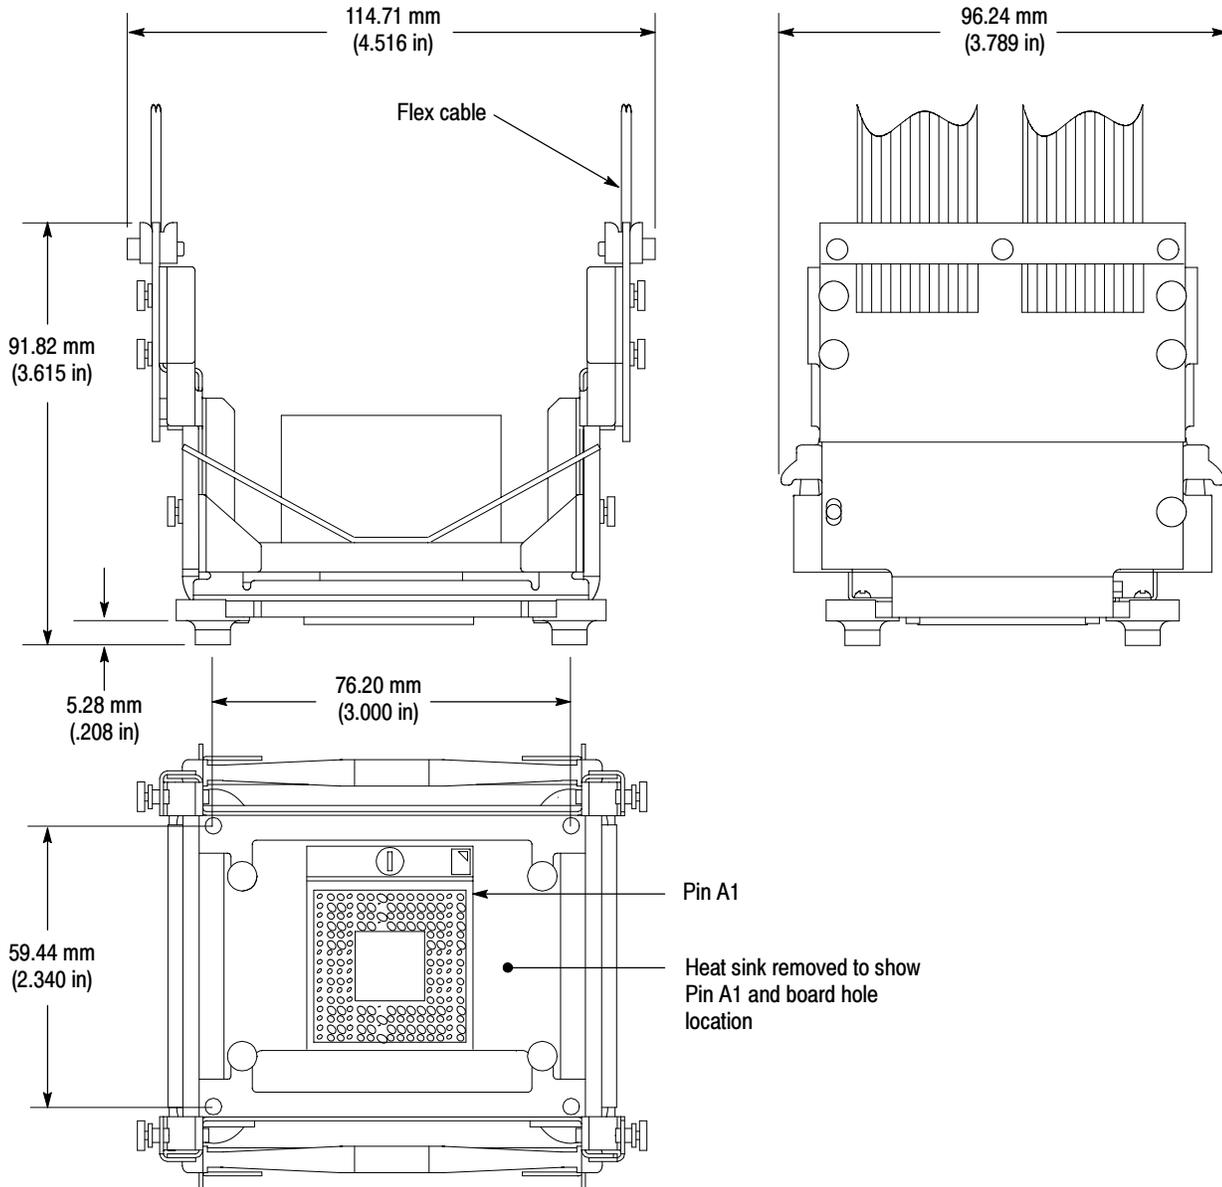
Dimensions of the 478 Pin Socket probe head
